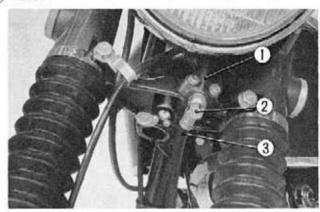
① Joint ③ Oil hose ② Oil bolt
